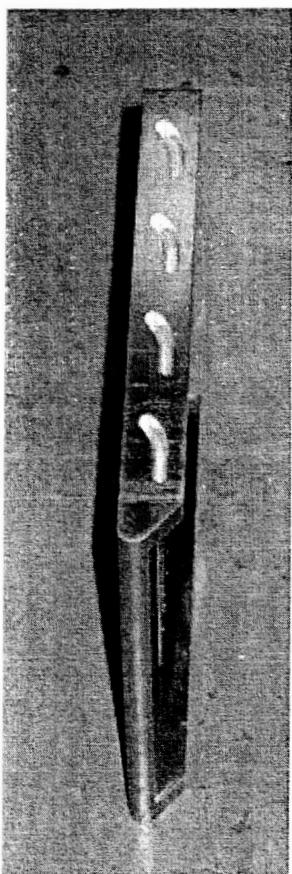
Close-up View of Sealing Plate with Cam-Lock Grooves
